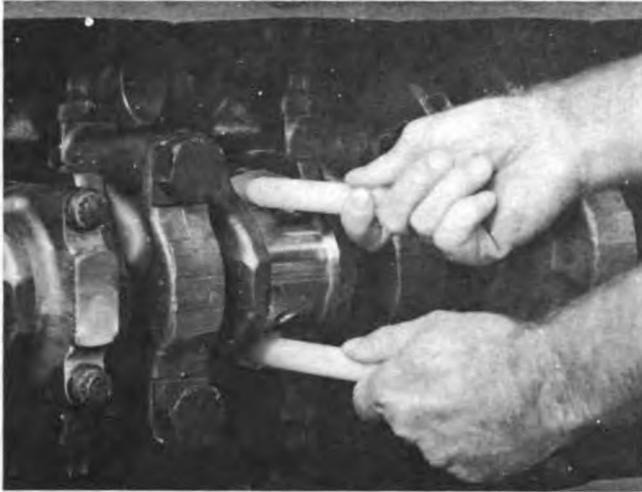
Position The Connecting Rod Against The Crankshaft Journal.
